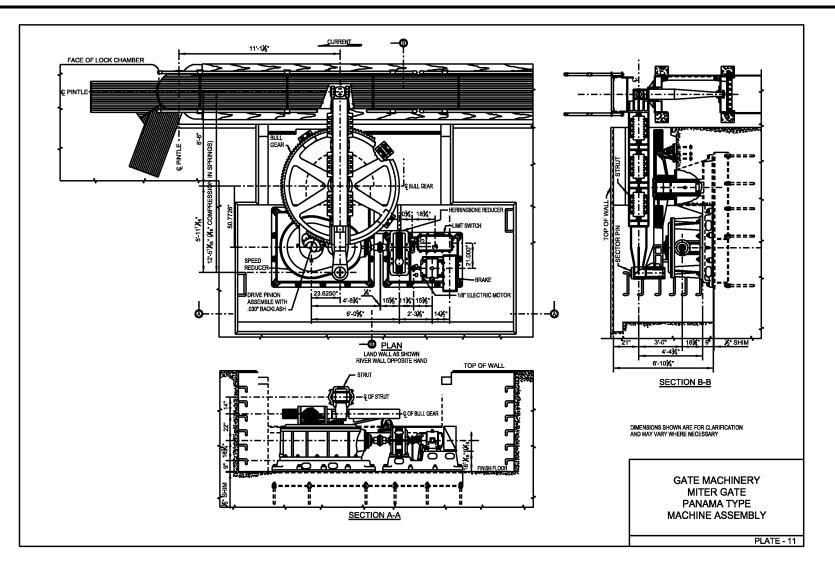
Plate 11: Gate machinery miter gate, Panama type machine assembly
